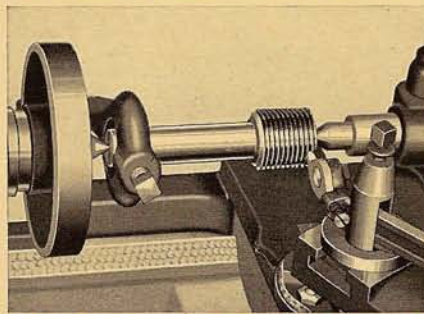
Cutting the Thread on a Large Diameter Special Tap.
